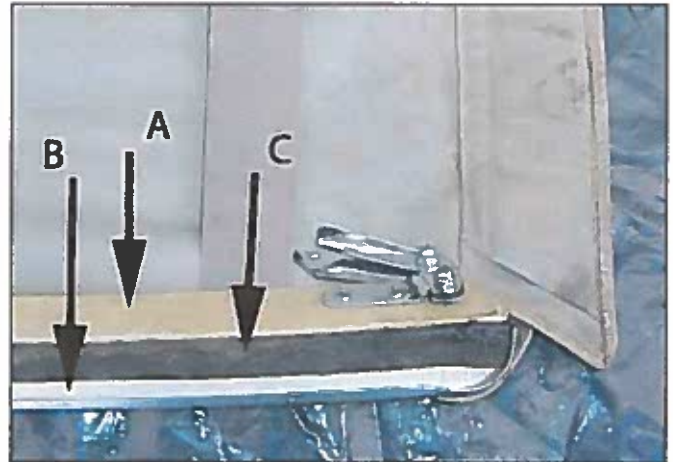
The front bow on BN4 and BT7 Healeys is a wood piece, covered with top material (A). An aluminum trim piece (B) is screwed against the wood (hiding the joint of the covering material) and has a front edge configured to hook onto the windshield frame. A simple foam rubber seal strip (C) is glued to the aluminum. With the bow hooked to the windshield, the latches holds it tightly in place. [This photo of a NOS Grey BT7 top courtesy of Peter Svilans]
